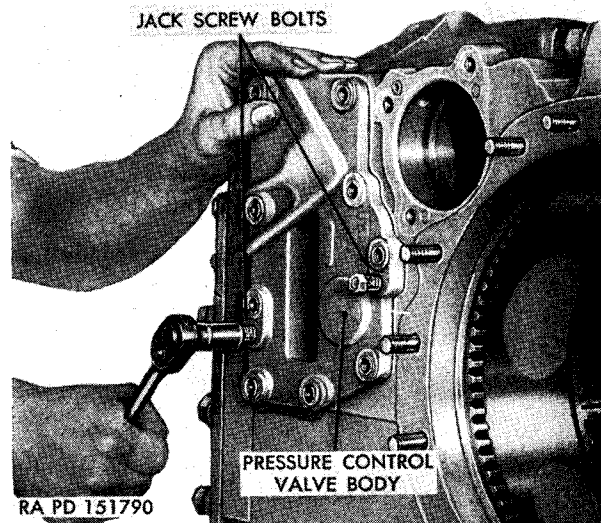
Separating pressure-control valve body from left housing using jack screws.
